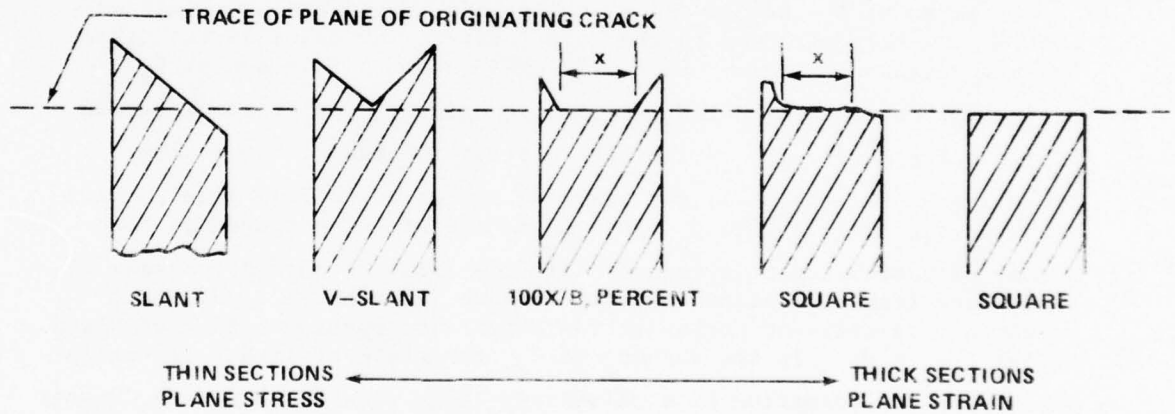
Types of fracture surfaces illustrated by section views taken normal to direction of crack propagation.
